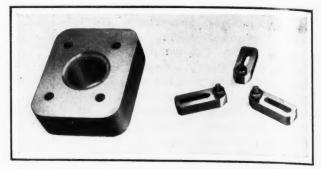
Adapter Plate and Adjustable Chuck Back-stops
